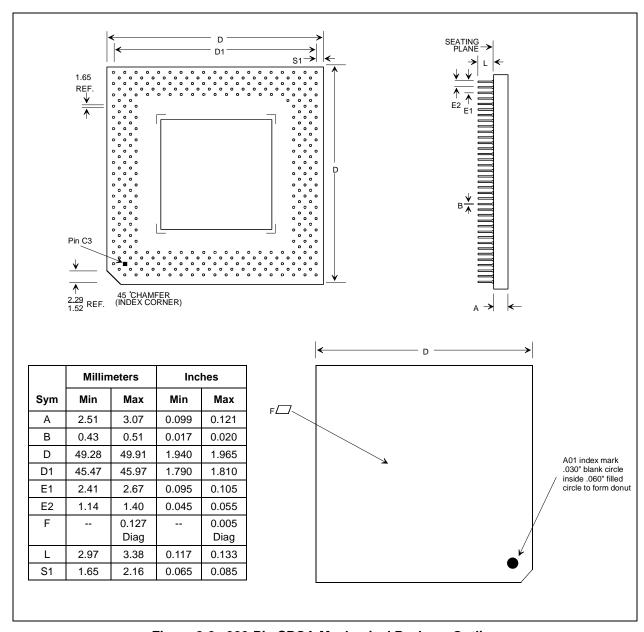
320-Pin SPGA Mechanical Package Outline
